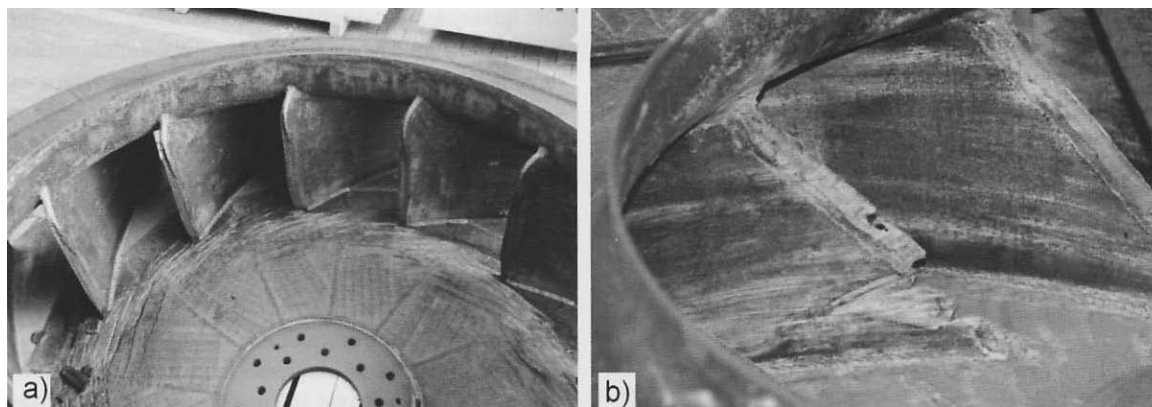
Wear of industrial ventilators after deployment: a) Wear of bottom plate, b) Wear of fan blades [5].
